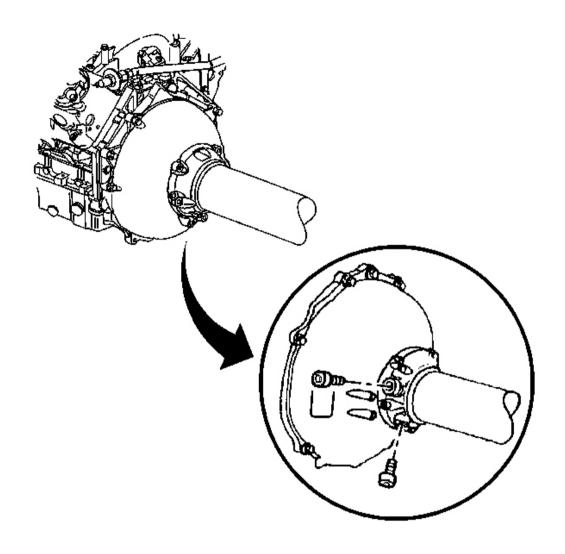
Propeller Shaft Hub Clamp & Bolt Courtesy of GENERAL MOTORS CORP.
